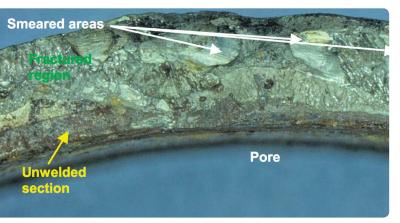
Typical section of the aft side fracture surface of the right side propeller shaft forward weld, after cleaning. The areas of fracture, lack of weld penetration, and smearing damage are labeled. Pores were also present in the fractured areas of this weld (~30X magnification).
